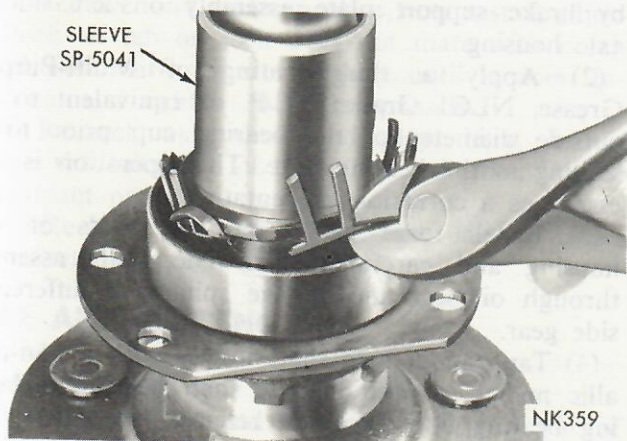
Cutting Out Roller Bearing Retainer bearing collar.
